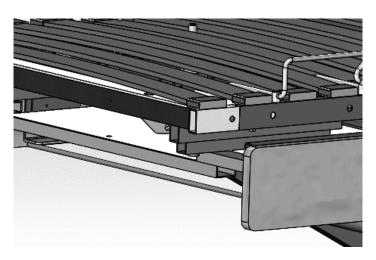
Assembly of the foot part extension (220 cm lying surface length)
